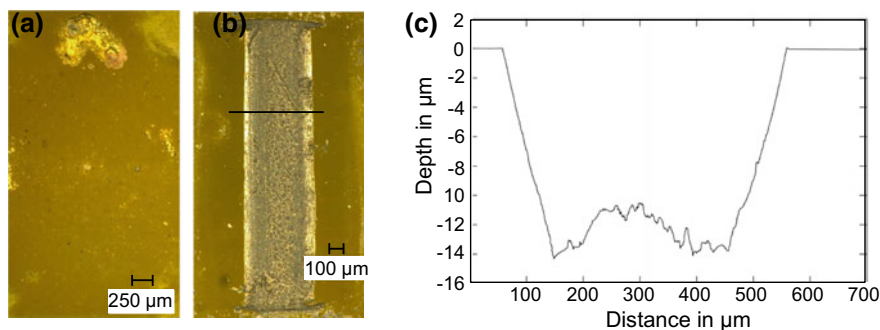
Diamond surface after contact test with mischmetal at 750°C and 20 h (a) and iron at 850 °C and 5 h machining (b) and profile section of iron machined diamond (c) [Bri09]
